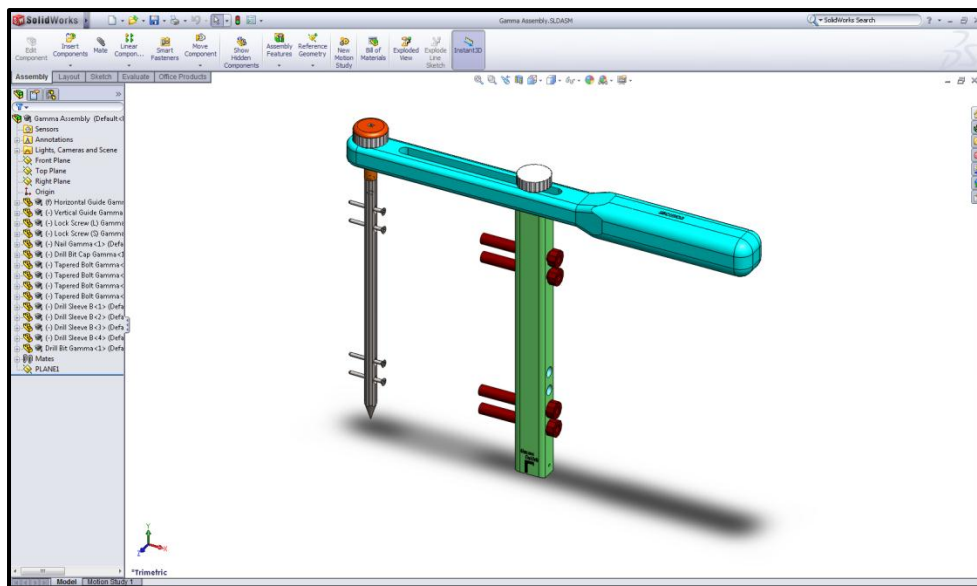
SOLIDWORKS ASSEMBLY OF COMPONENTS
